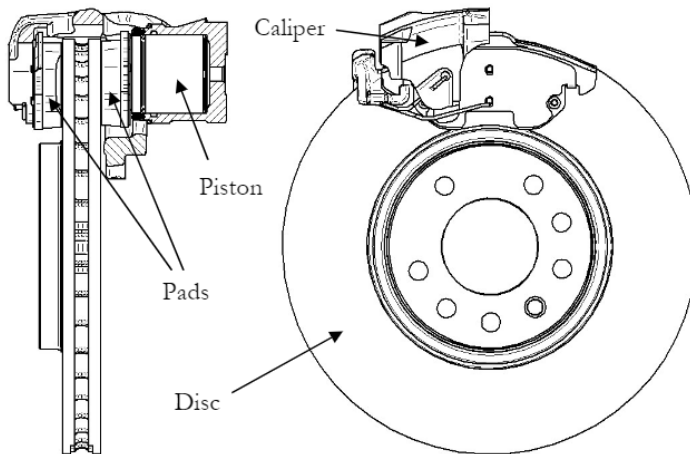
Disc brake assembly with a single-piston floating caliper and a ventilated disc [11]
